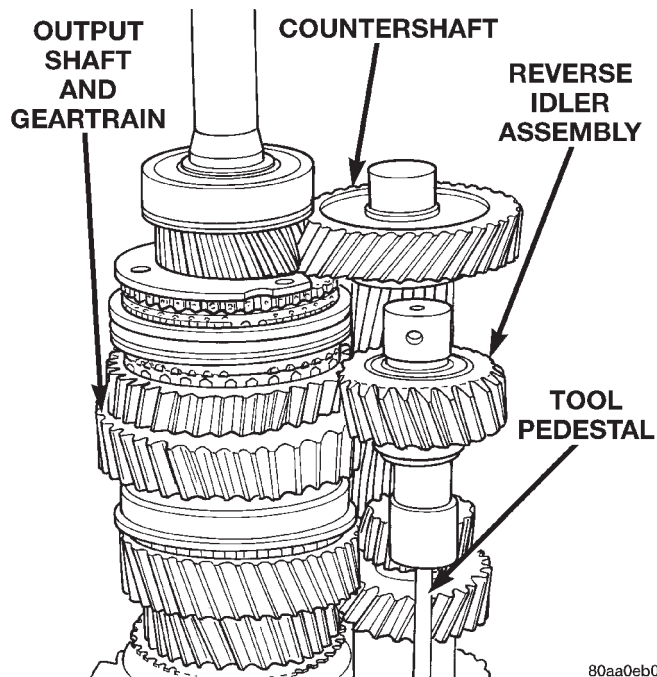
Reverse Idler Assembly Positioned On Assembly Fixture Pedestal
